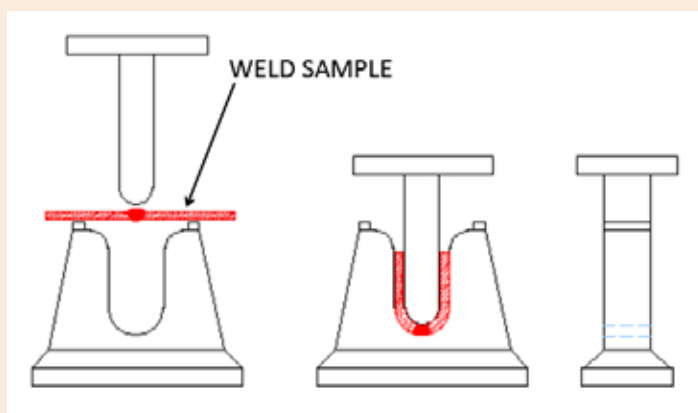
Weld bend fixture. (Drawing based on accepted device designated by ASTM E190)
